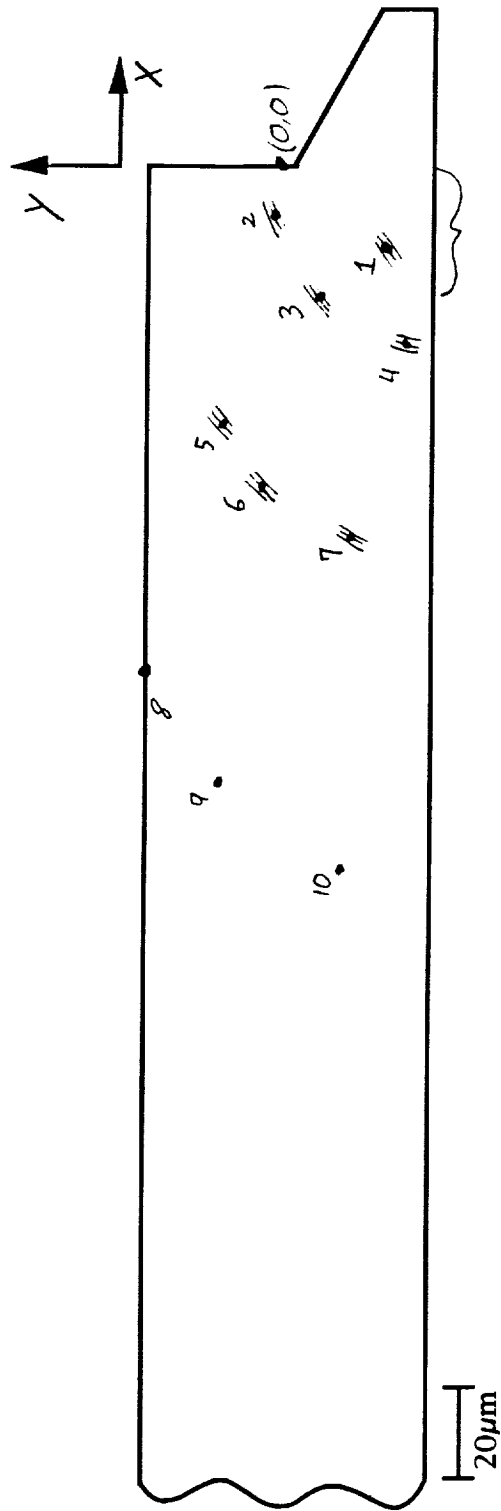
Rivet hole schematic: Upper rivet row, hole number 3J11, fatigue crack growth is in the forward direction.
